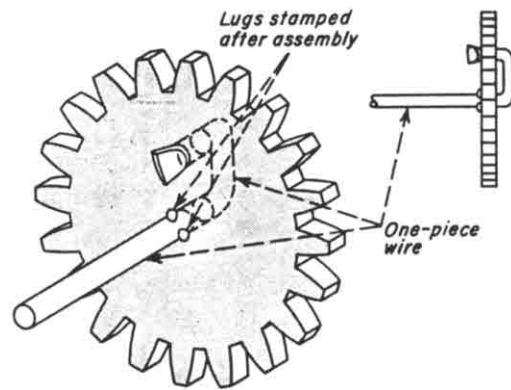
A stamped gear and formed wire shaft can be used in light-duty application. Lugs stamped on both legs of the wire prevent disassembly. The bend radii of the shaft should be small enough to allow the gear to seat.
